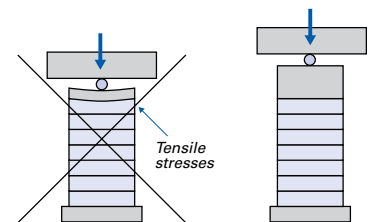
Proper dimensioning of the end pieces in the case of point contact
